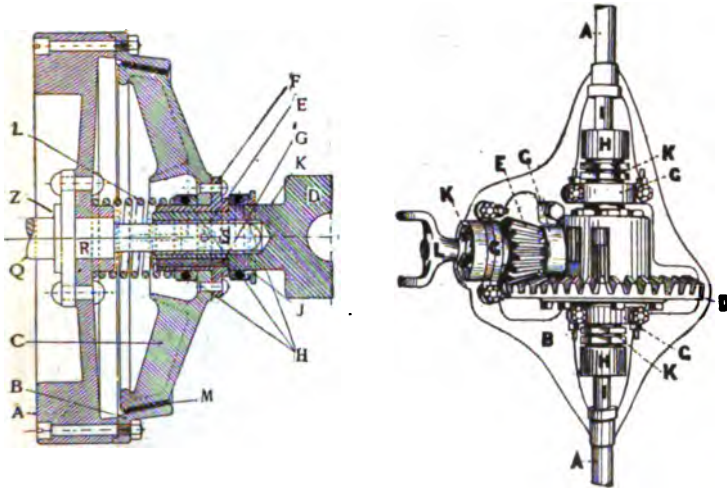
Internal Cone Clutch of the Peerless Car. A, engine fly-wheel; B, female cone; C, male cone; D, universal coupling on male cone; E, bushing on D; F, collar keyed on D; G, key; H, ball bearings for taking up the thrust on disengaging clutch; J, flange on ball cone; K, receptacle on D for operating yoke; L, spiral spring for retaining clutch surface contact; M, leather band riveted on C, giving good friction surface; Q, main shaft; R, portion of shaft turned down to fit fly-wheel; S, portion of shaft turned down to receive clutch sleeve; Z, flange to which fly-wheel is bolted.
